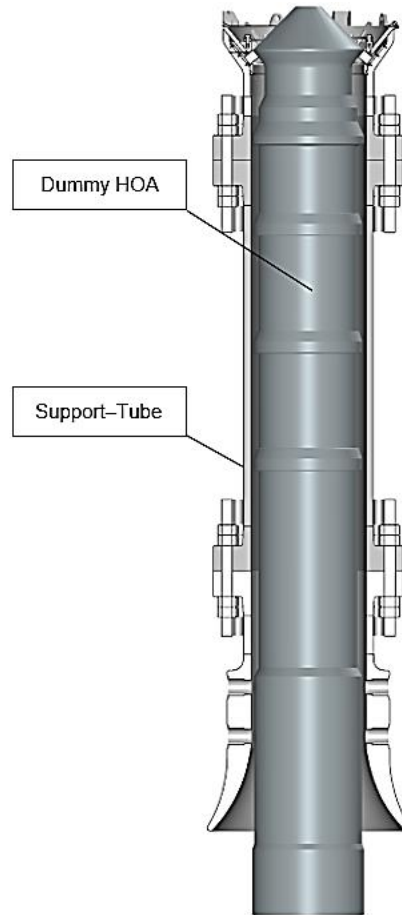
Schematic View of the Dummy HOA for Coupling/ Assembly Verification.
